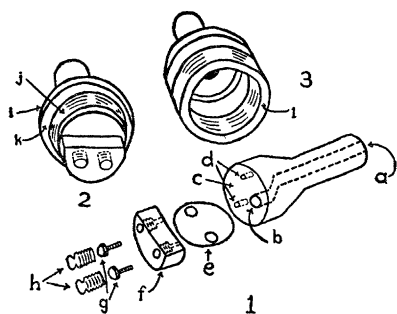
The check valves. 1. Valve No. 1 shown un-assembled. 2. Valve No. 2 shown assembled. 3. Cap for valve No. 2.
